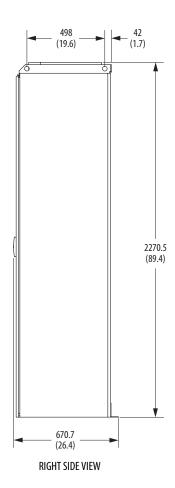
AFE Frame 13 in IP20 2500 MCC Style Enclosure Dimensions
